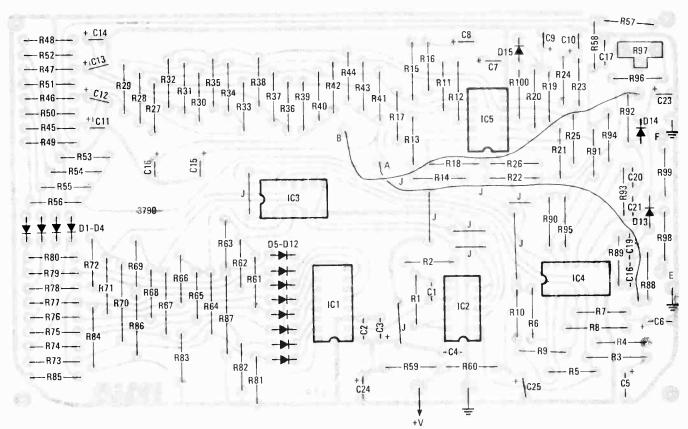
PARTS PLACEMENT DIAGRAM shows exactly where every component is mounted on the circuit board.
